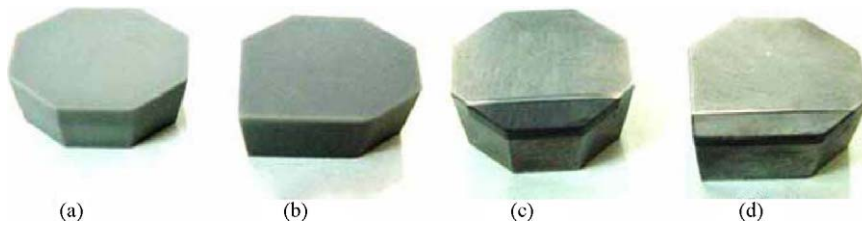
The tools used in the tests. Ceramic tools: (a) roughing and (b) wiper. PCBN tools: (c) roughing and (d) wiper.
